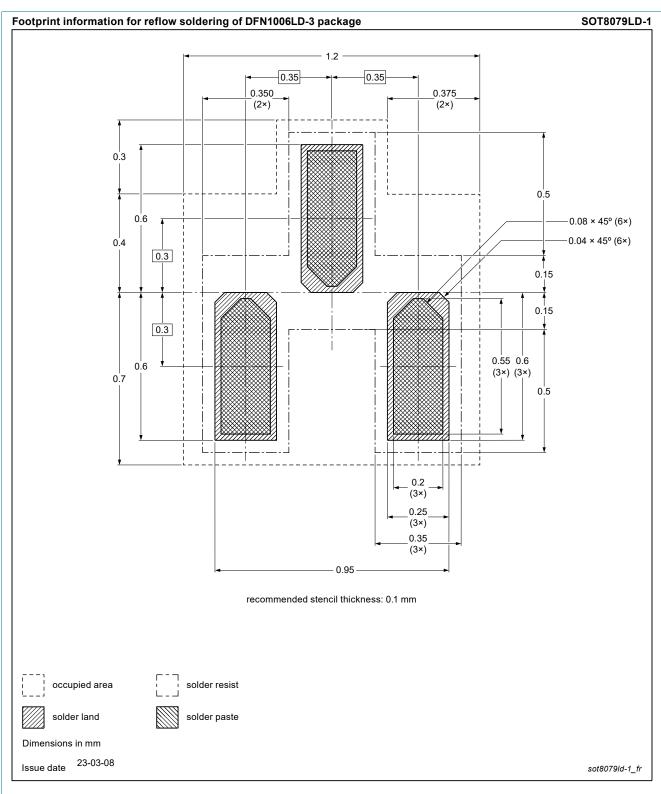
Reflow soldering footprint for DFN1006LD-3 (SOT8079LD-1)
